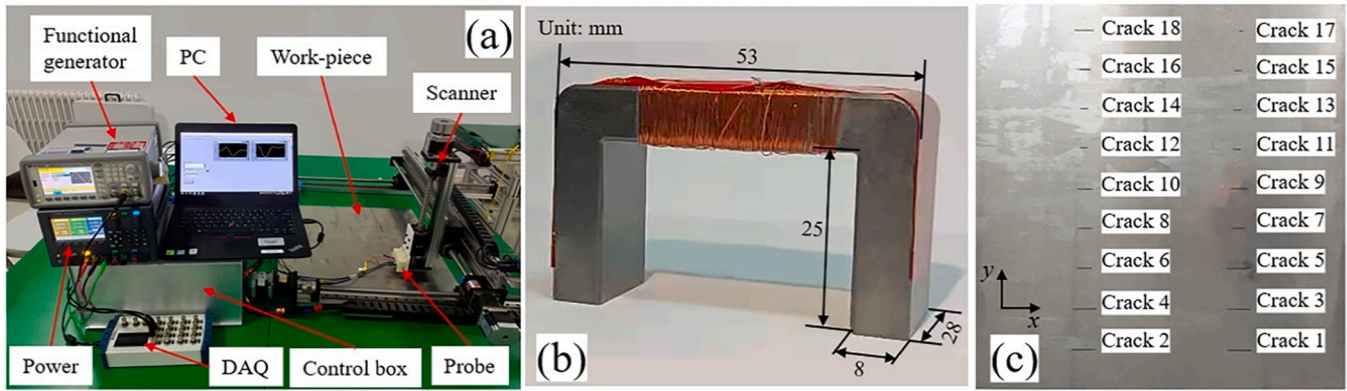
(a) Photograph of ACFM detection system. (b) U-shaped yoke with coil. (c) Top-view of cracks on workpiece.
